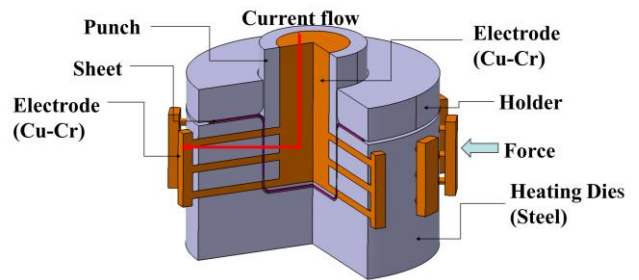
Concept design of drawing and concurrent welding process by electric resistance heating steel dies and copper electrodes [9]
